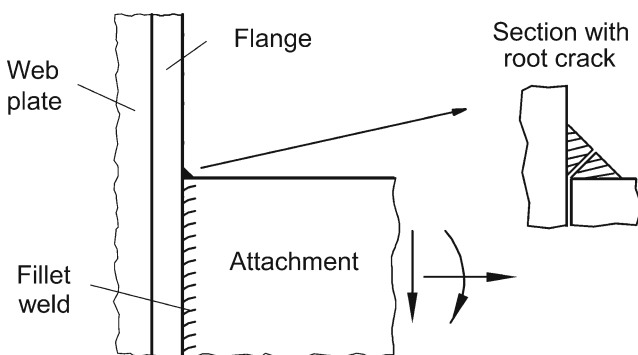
Fillet-welded end of a loaded stiffener
